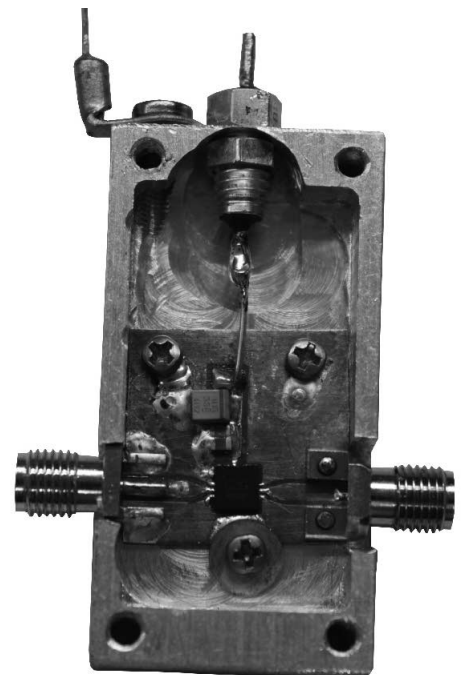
Assembled multiplier/doubler in a machined aluminum housing.
